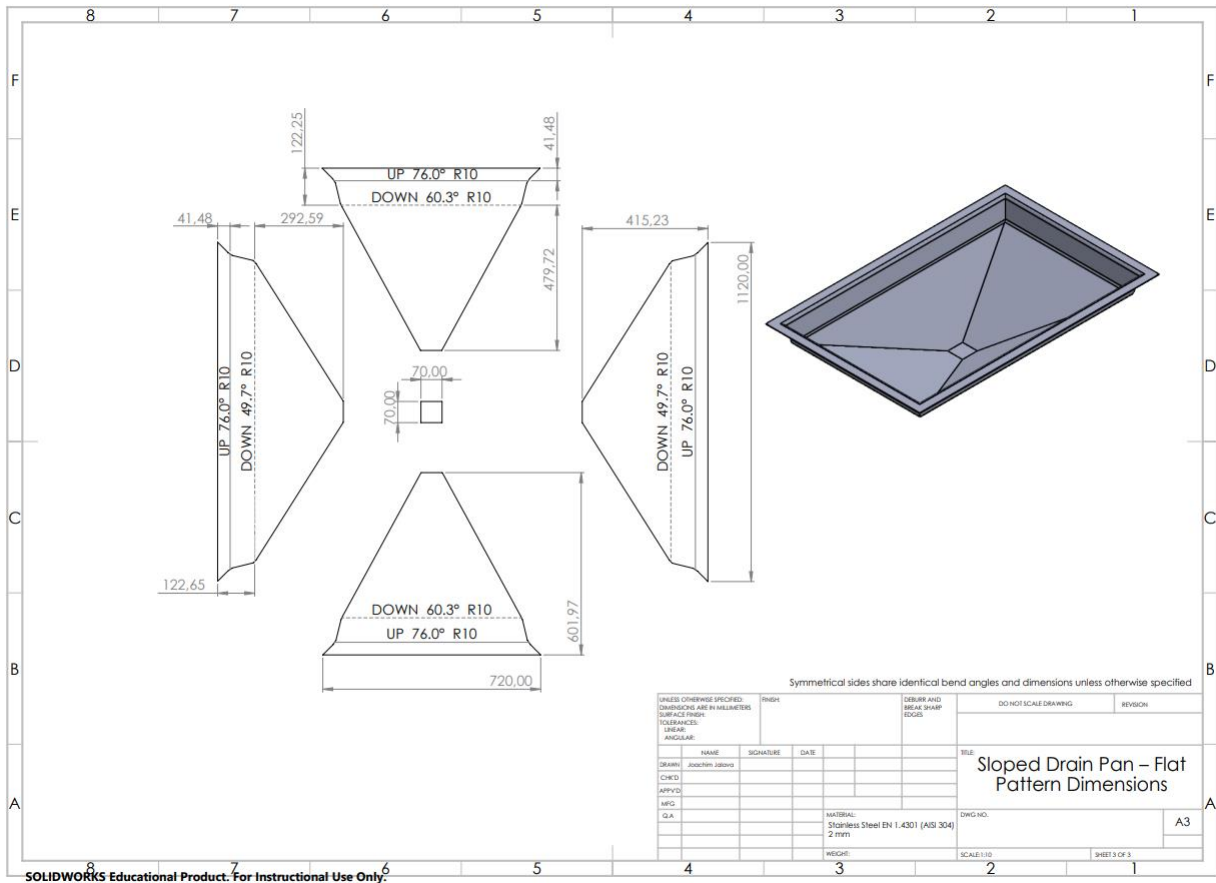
Flat pattern drawings of the sloped drain pan, with bend angles and dimensions.
